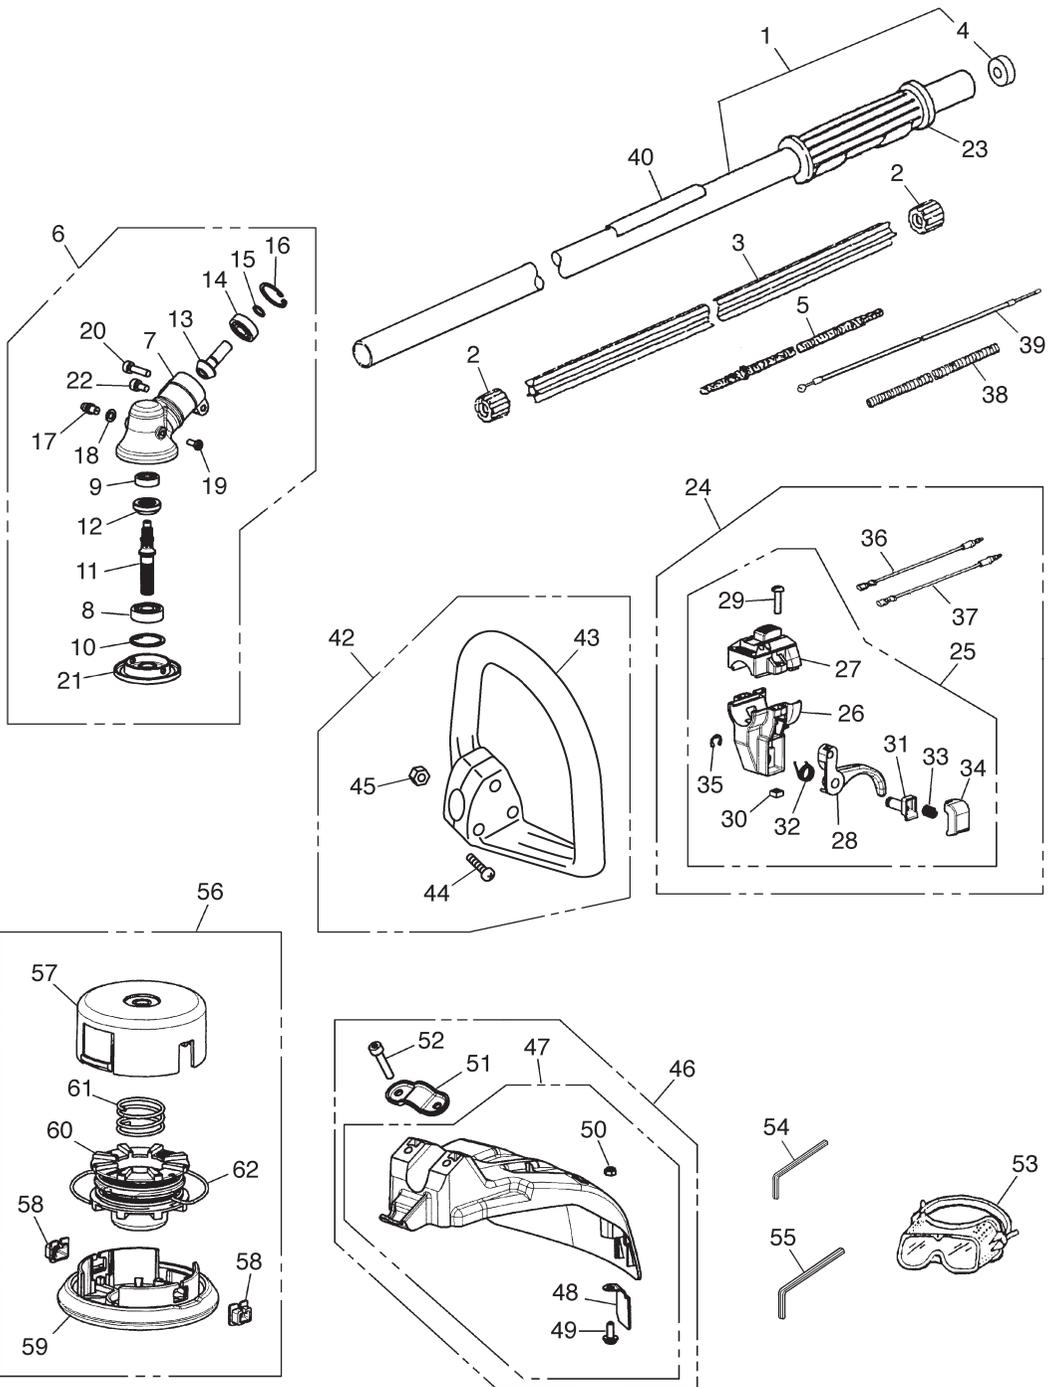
DRIVE UNIT BC250 (S/N 40400101 and up)
